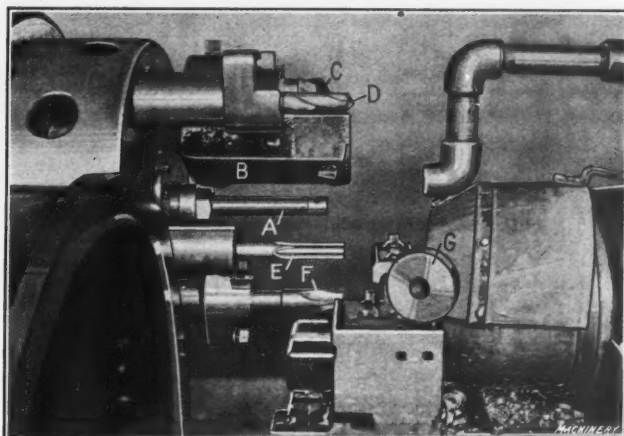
Making Redrawing Die Blanks in a Cleveland Automatic Screw Machine
